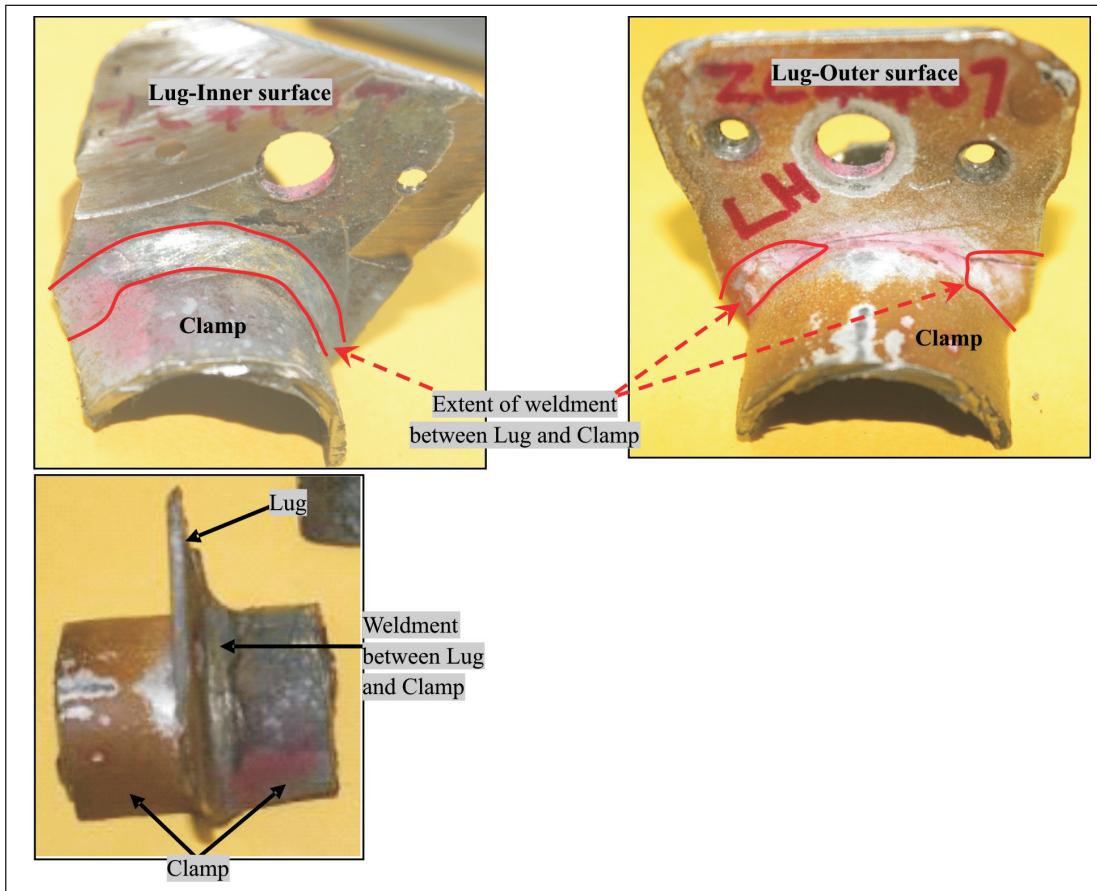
Different views of the lug assembly after dismantling it from the helicopter. Extent of weldment between the parts lug and clamp is indicated
